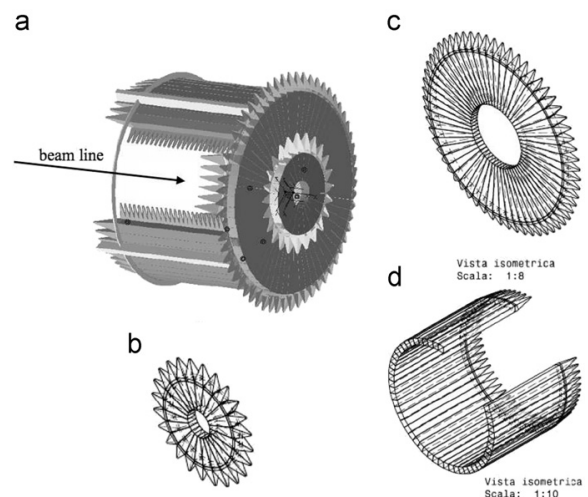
Technical drawing of the KENTROS Proton Tagger: (a) general assembly, (b) small end-cap, (c) big end-cap and (d) barrel.
